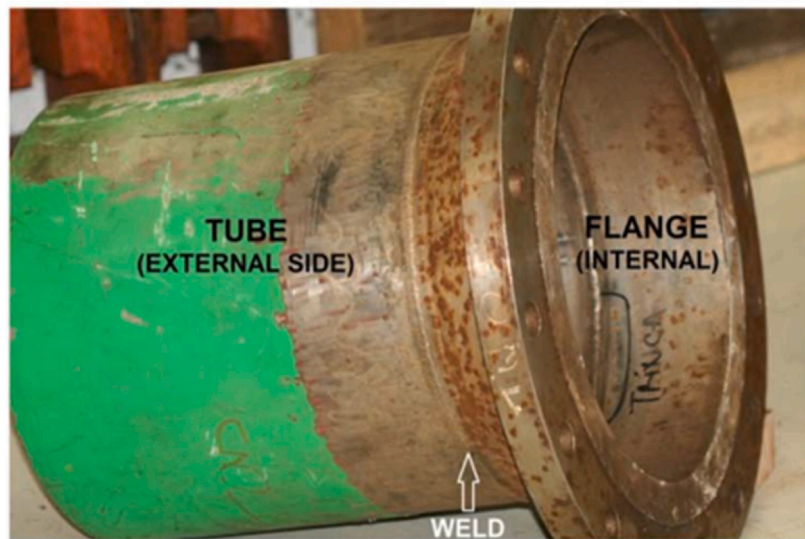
Flange failure due to severe internal pitting corrosion and circumferential crack, visibly marked by a black line on the internal side of the flange² (Tavares et al., 2018).
